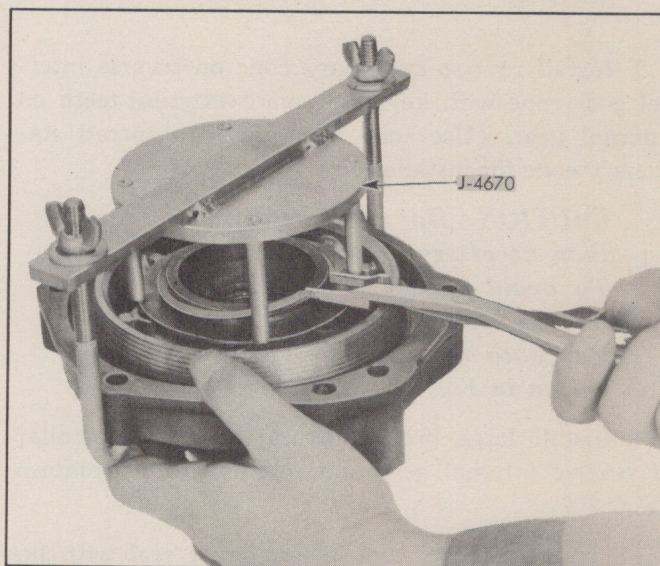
Installing Reverse Clutch Spring Retainer Snap Ring
